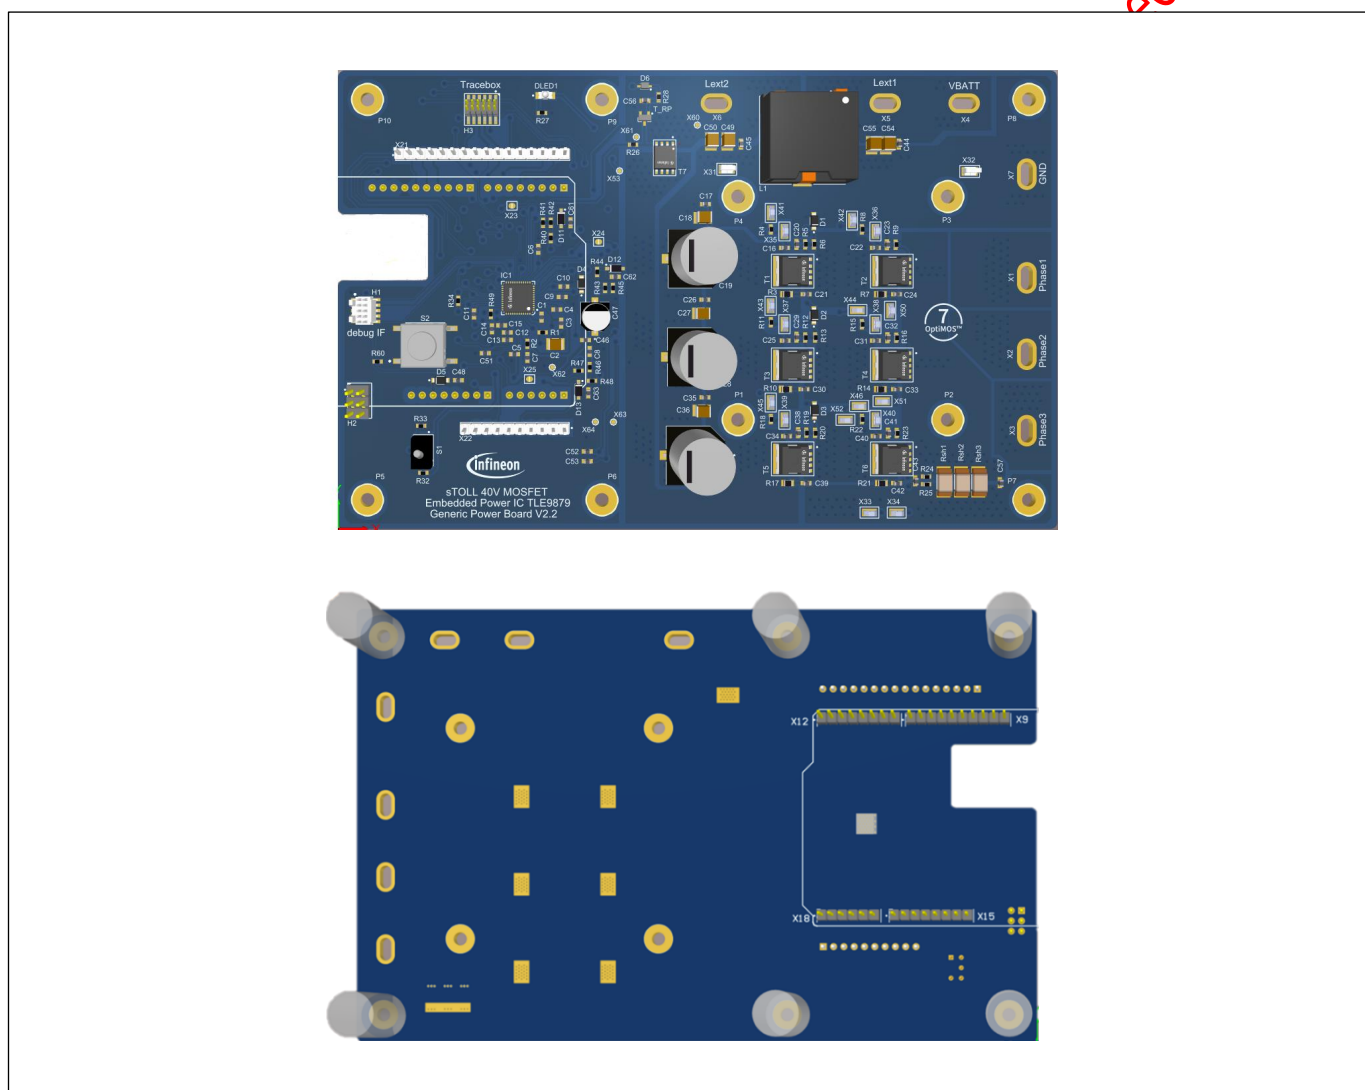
View to the evaluation Generic Power Board (top and bottom view)
